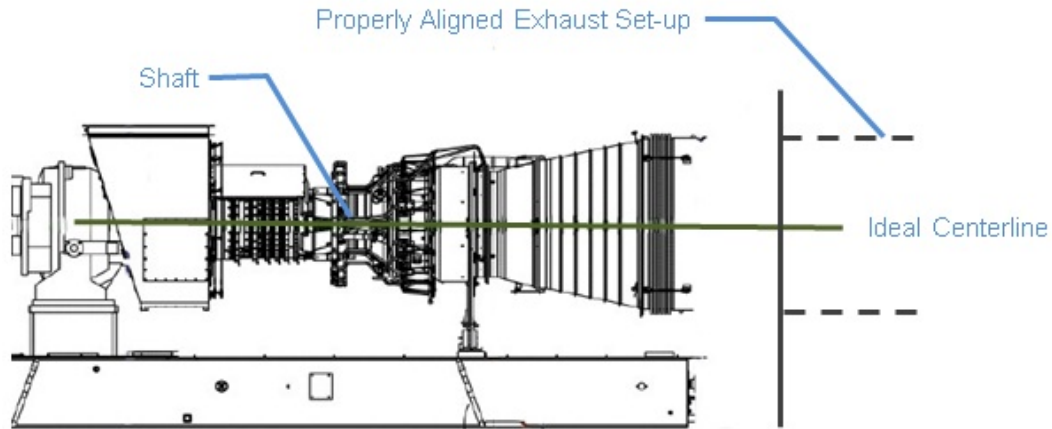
The shaft that runs through the engine should be centered with the exhaust outlet installed by the customer. When these are not in alignment, the forces caused by the misalignment will lead to wear on the gearbox at the other end of the shaft.
